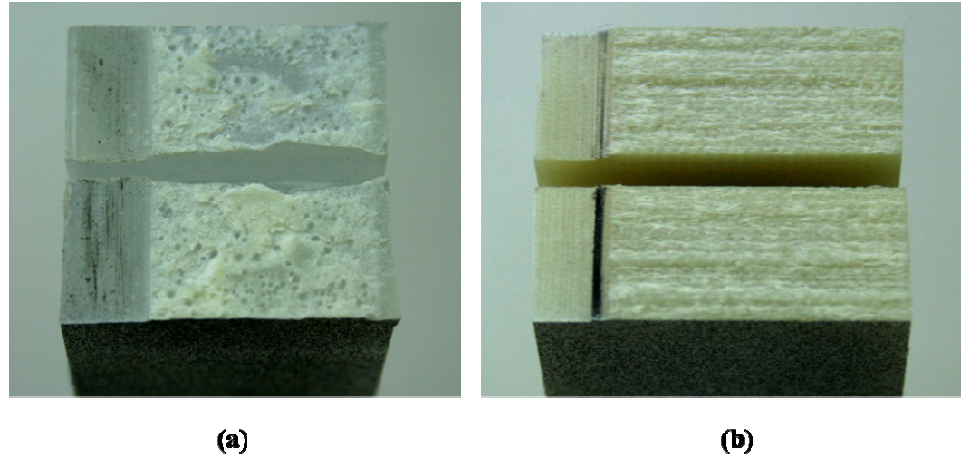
Fracture surfaces of (a) PWII bonded PMMA, and (b) G10/FR4 Garolite SENB specimens
